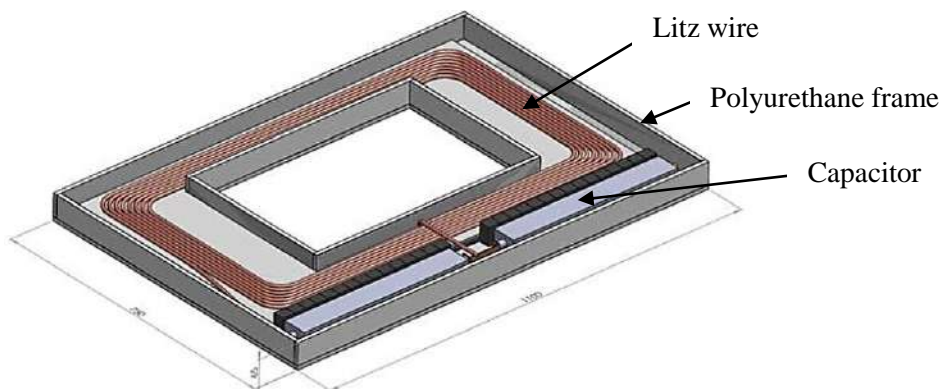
View of the primary coil prototype (dimensions 110 x 70 x 6.5 cm).
